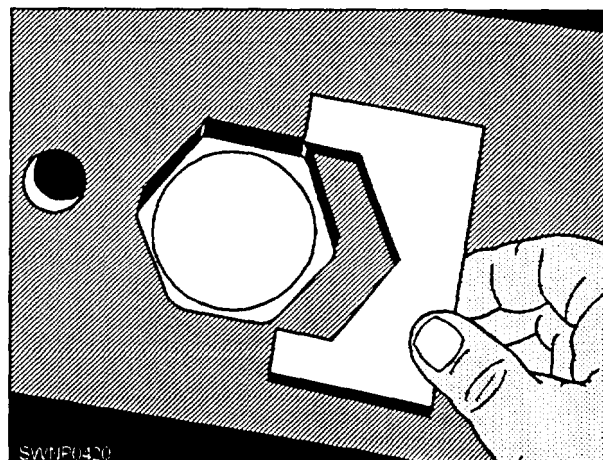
A KPI keeper plate being installed on an A6B bolt.
